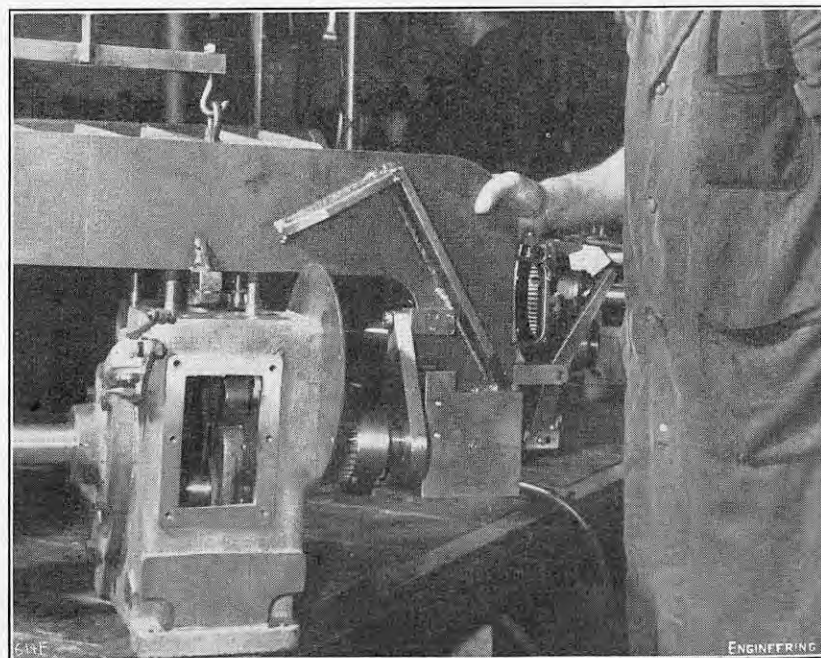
ASSEMBLING TIMING GEAR ON CRANKSHAFT.
